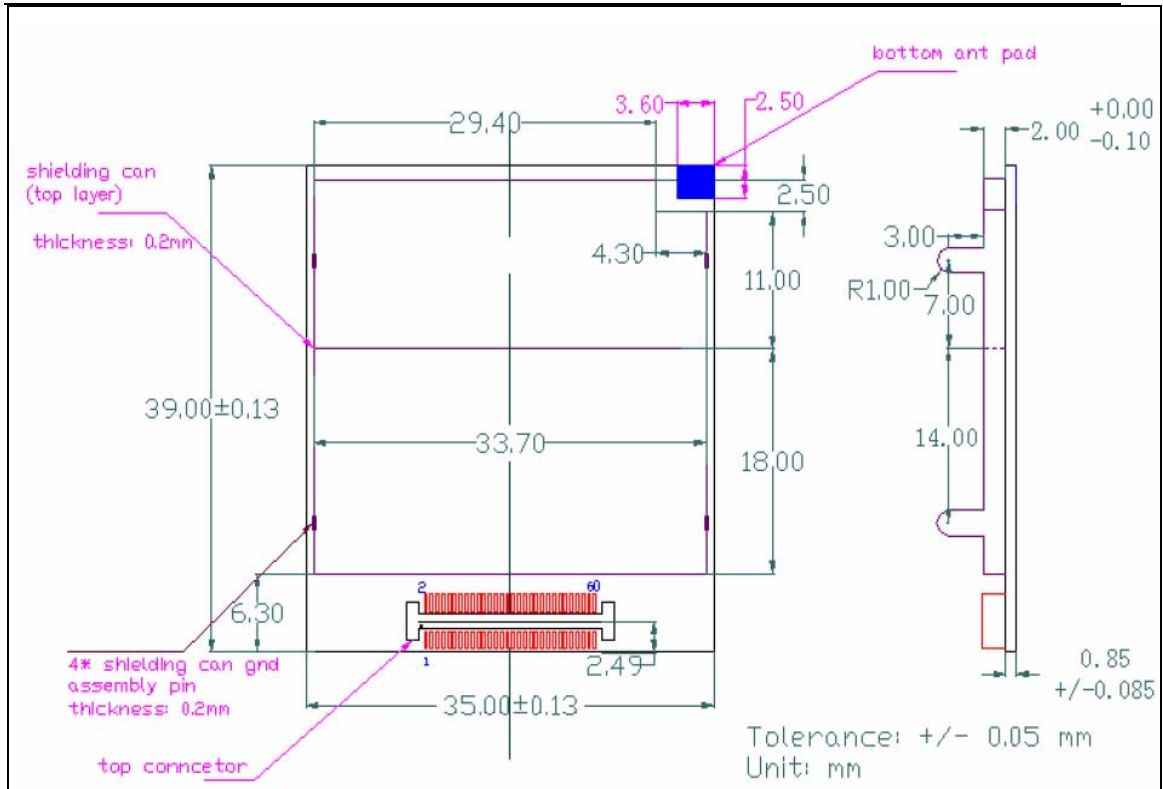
SM5100B-D mechanical dimensions (unit: mm)
